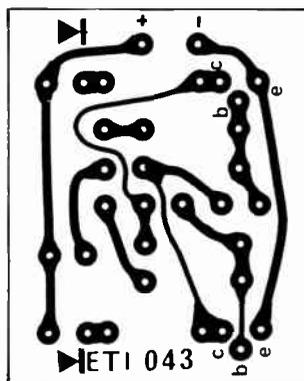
Printed circuit board layout – full size 40 x 50 mm.
